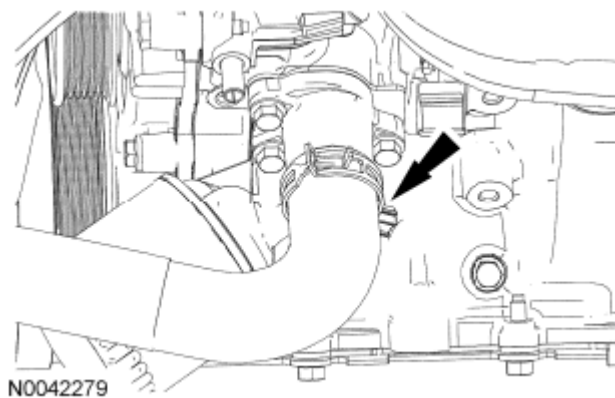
Locating Lower Radiator Hose And Oil Filter Adapter
